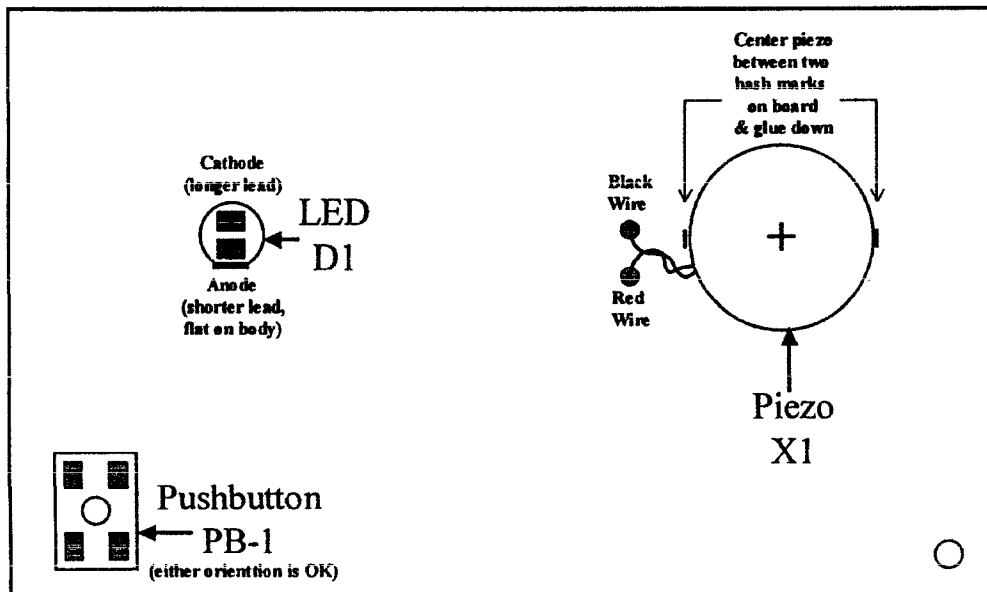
This figure represents the front side of the Badger pc board with the laminated badge removed.
